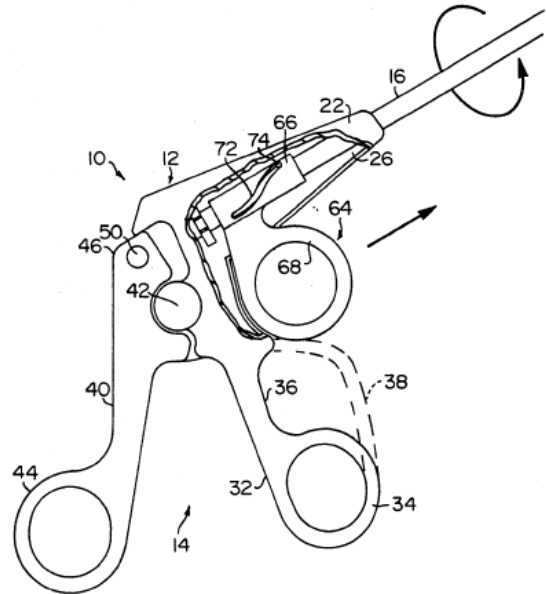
One-handed rotating tube endoscopic surgical device¹².
